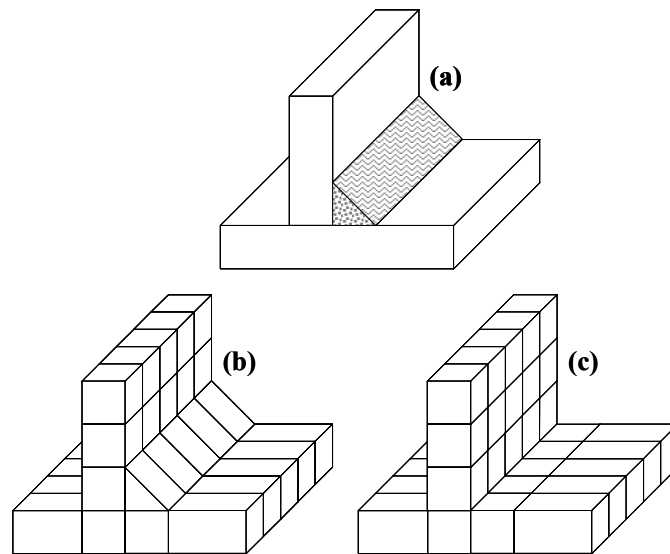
FEM analysis (“brick” elements) of fillet welds: a) joint geometry; (b) FEM model, including schematic weld representation; (c) FEM model without weld representation
